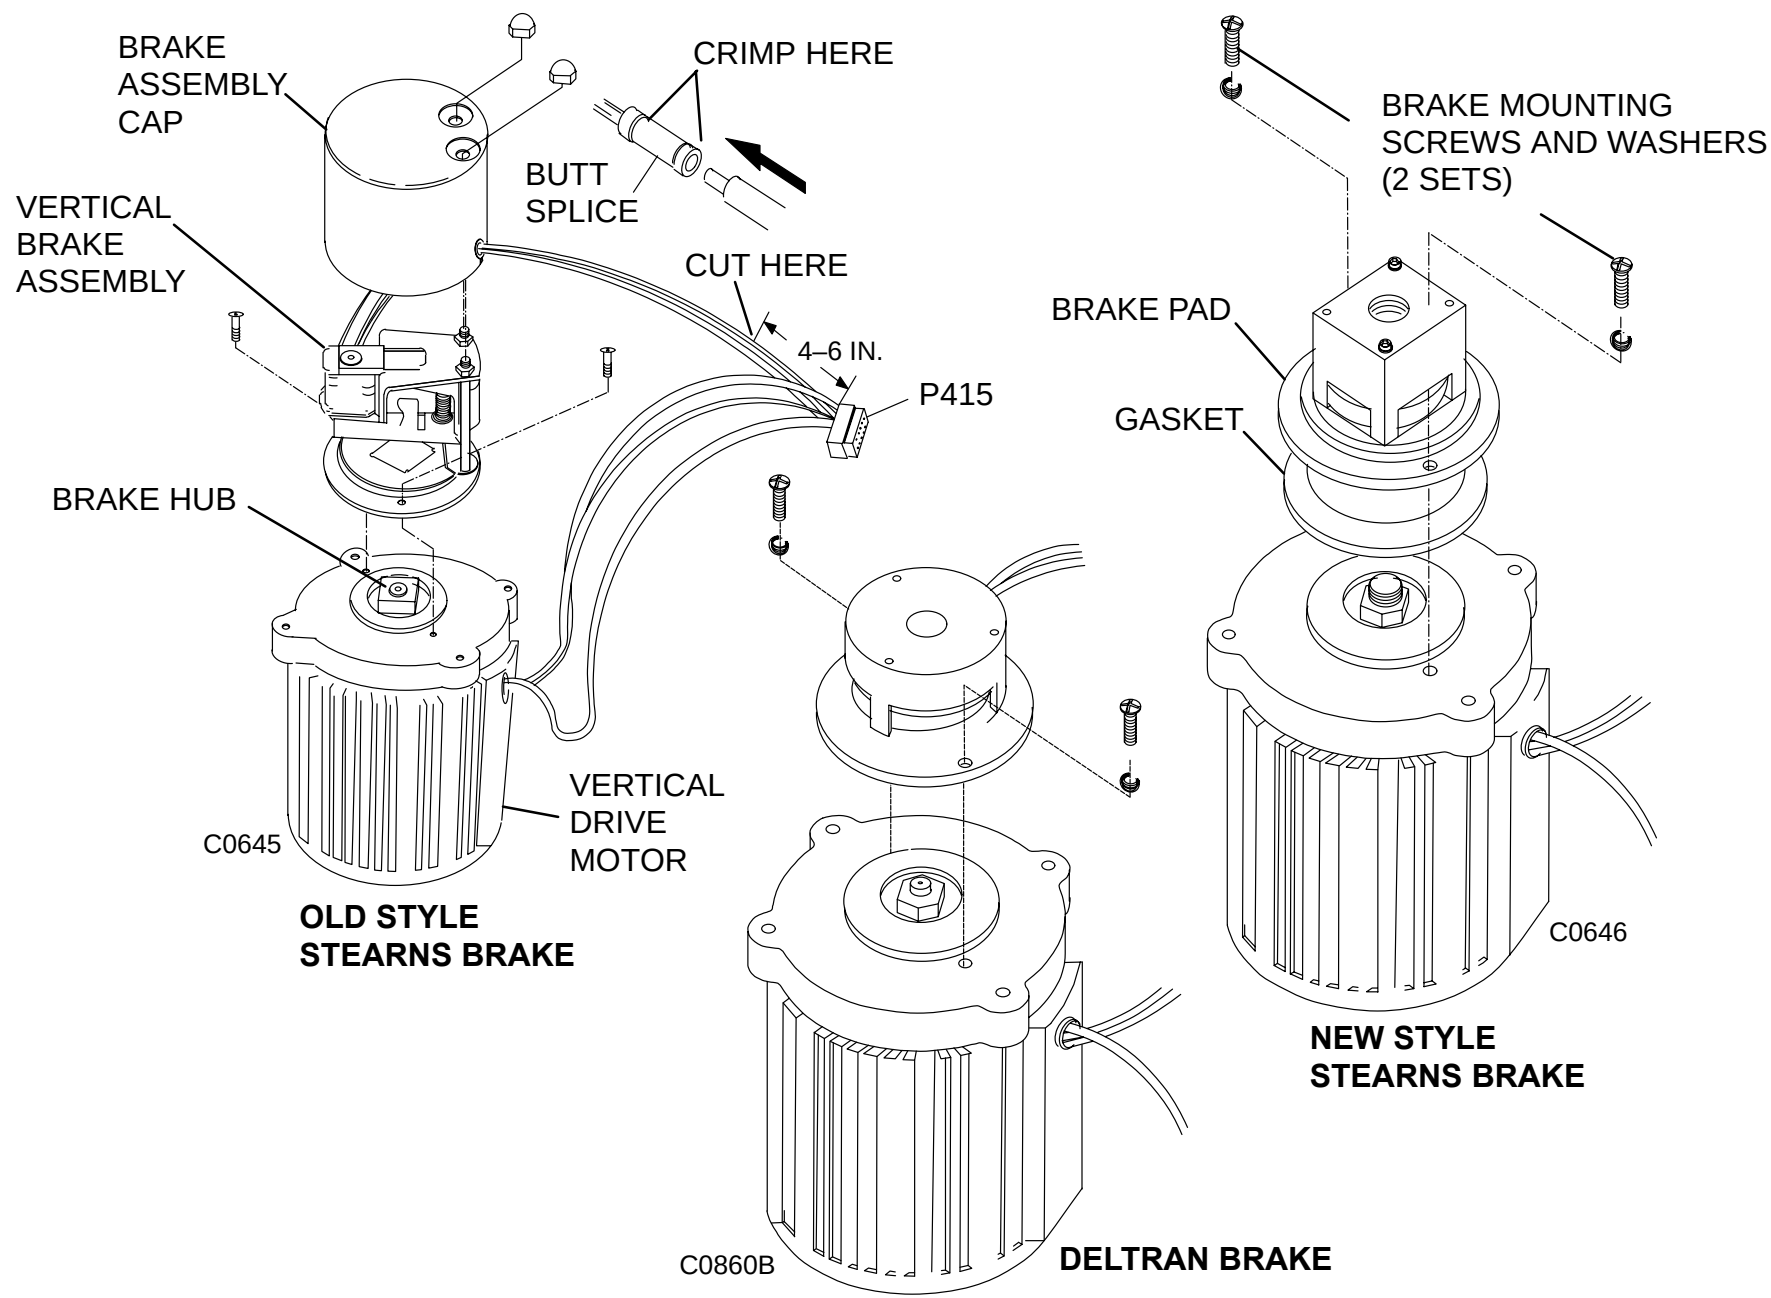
VERTICAL BRAKE ASSEMBLY
